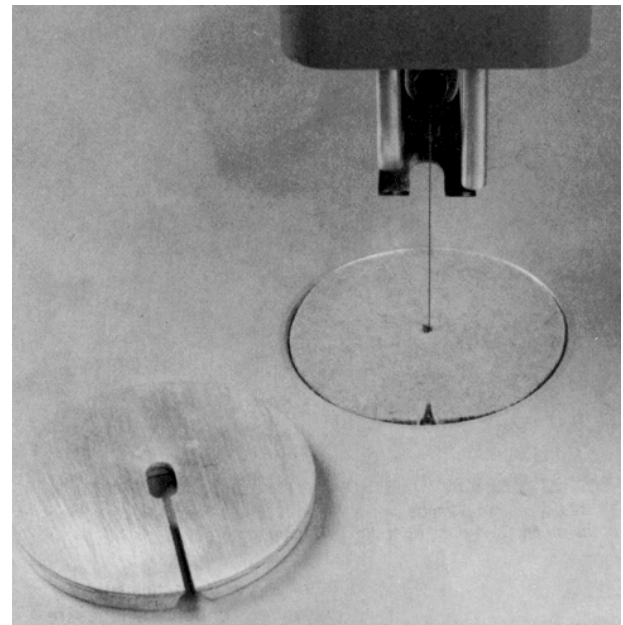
Make an auxiliary table insert out of hardboard to provide extra support for cutting small pieces or thin stock. A hole drilled in the center of the insert accommodates the blade.
